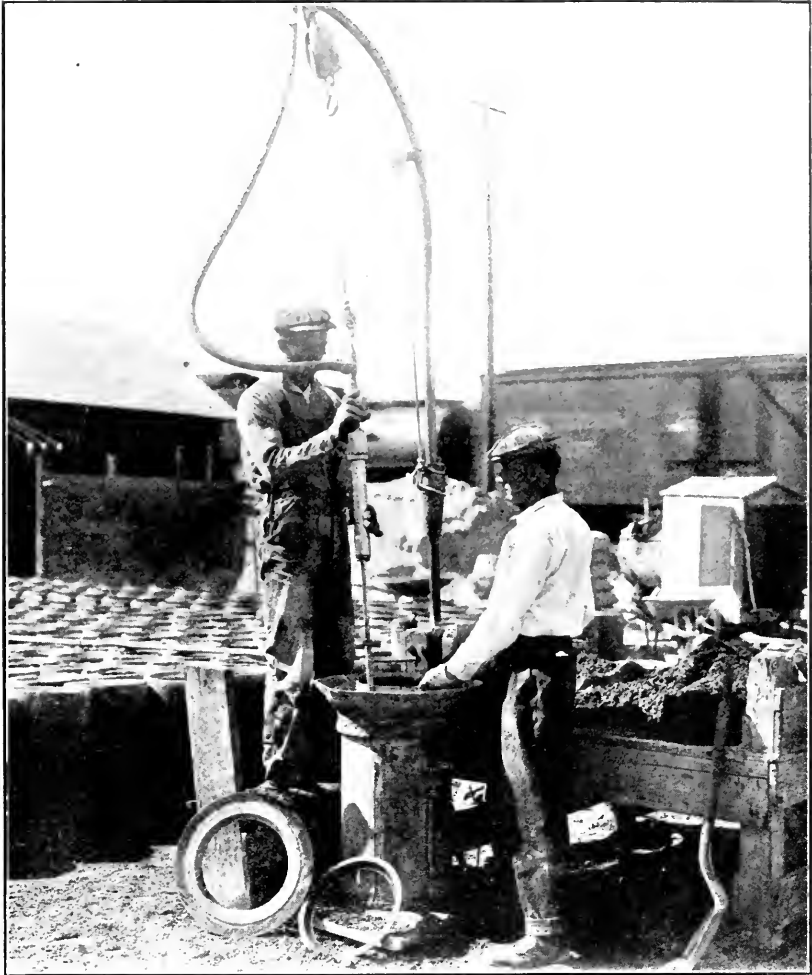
Filling the ordinary hand molds with a pneumatic tamper. There are six plants in California where these tampers are used successfully.
